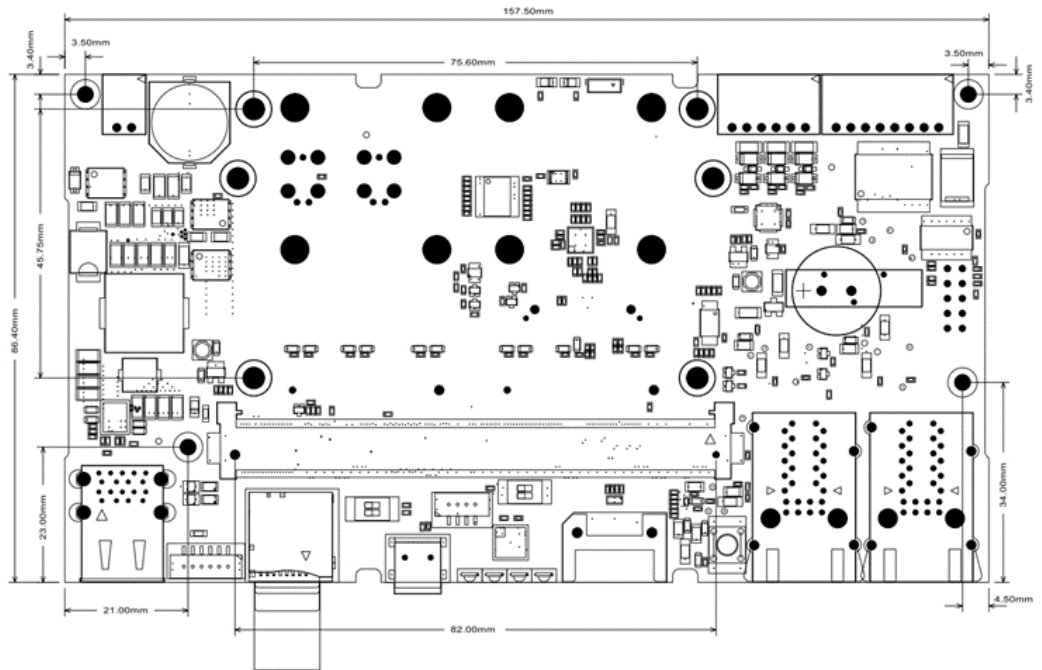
SBC-LS1043A2 Mechanical Dimensions
